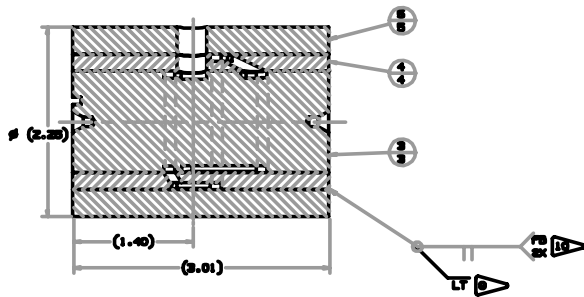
Drift Tube Slug Showing Cross Sections of Cooling Passages.
